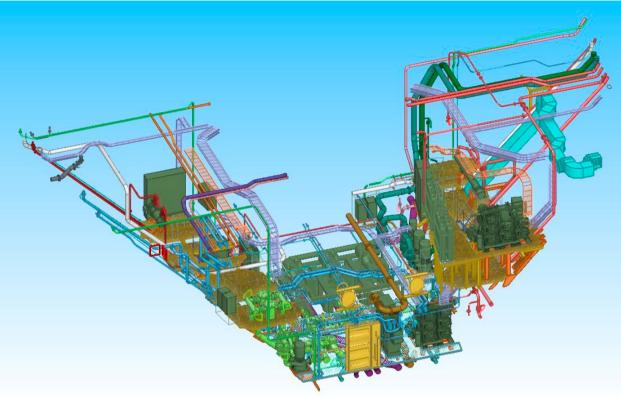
3D virtual prototype of the chiller space main machinery and equipment.
